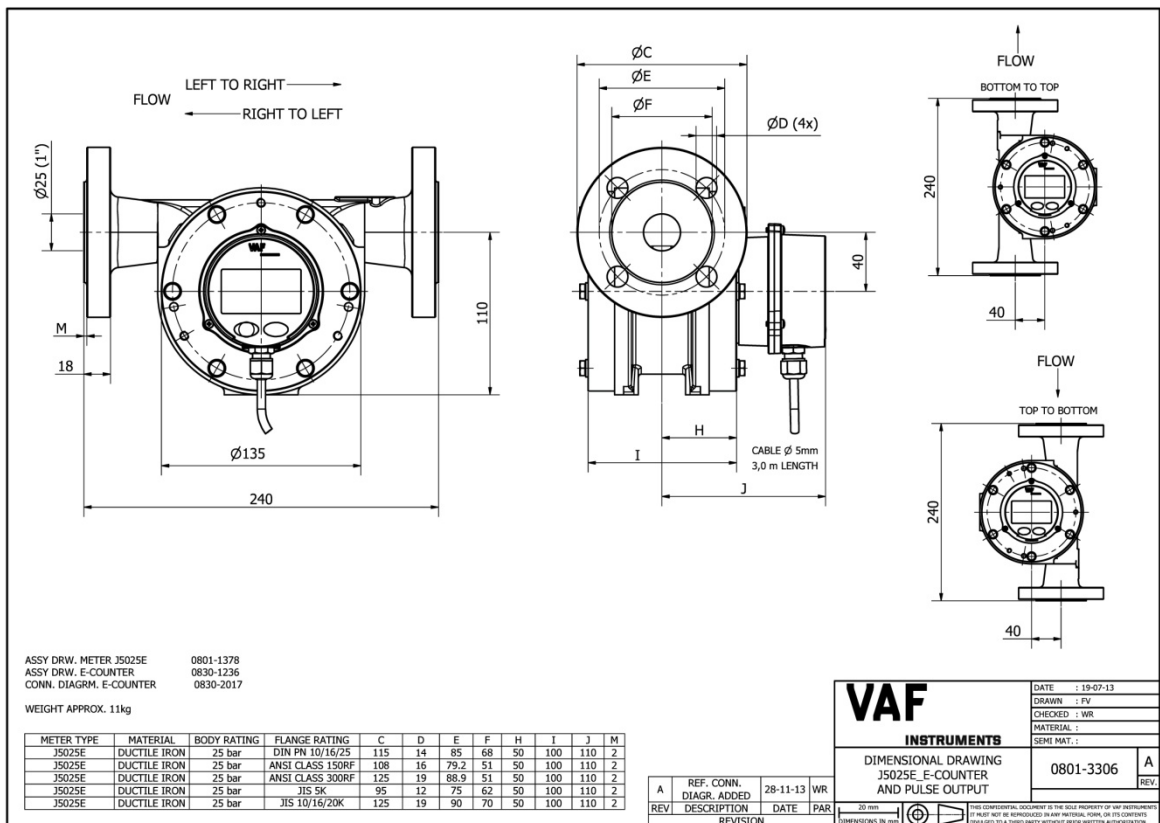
Drawing 0801-3306 – Dimensional drawing J5025E E-counter with pulse output
